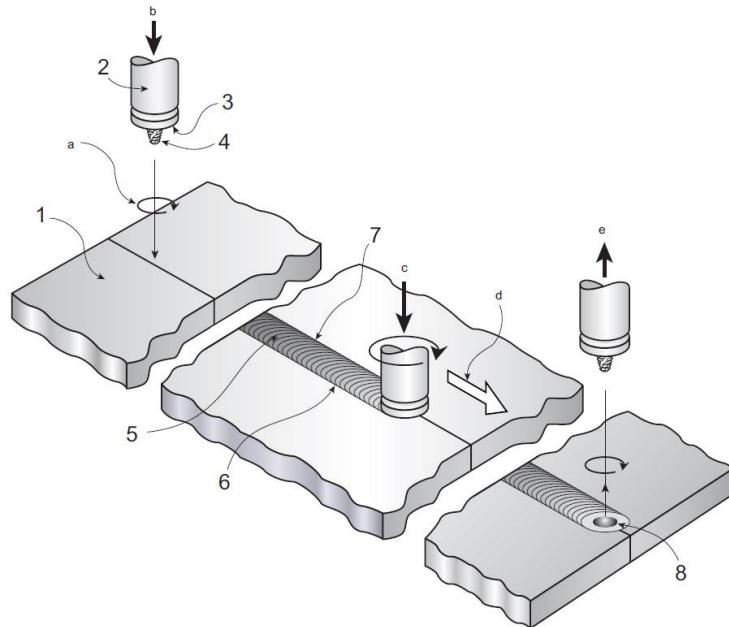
Examples of FSW features and parameters: 1) workpiece, 2) tool, 3) shoulder, 4) probe, 5) weld face, 6) retreating side of weld, 7) advancing side of weld, 8) exit hole, a) Direction of tool rotation, b) Downward motion of tool, c) Axial force, d) Direction of welding, e) Upward motion of tool [2-12].
